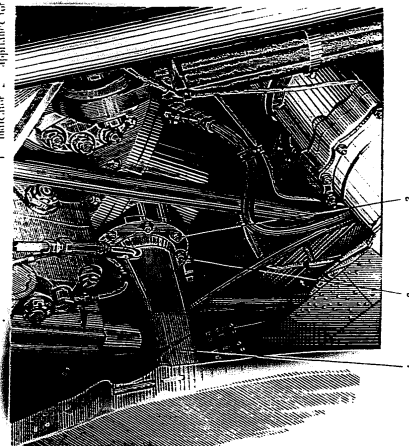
INSTALLATION OF FAN DRIVE CARDAN SHAFT SHROUD
